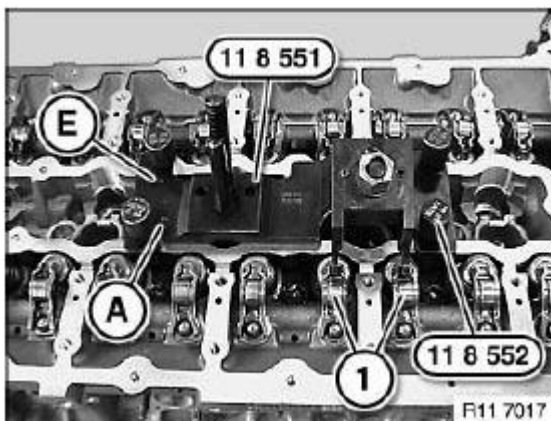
Identifying Special Tools 11 8 551 And 11 8 552
